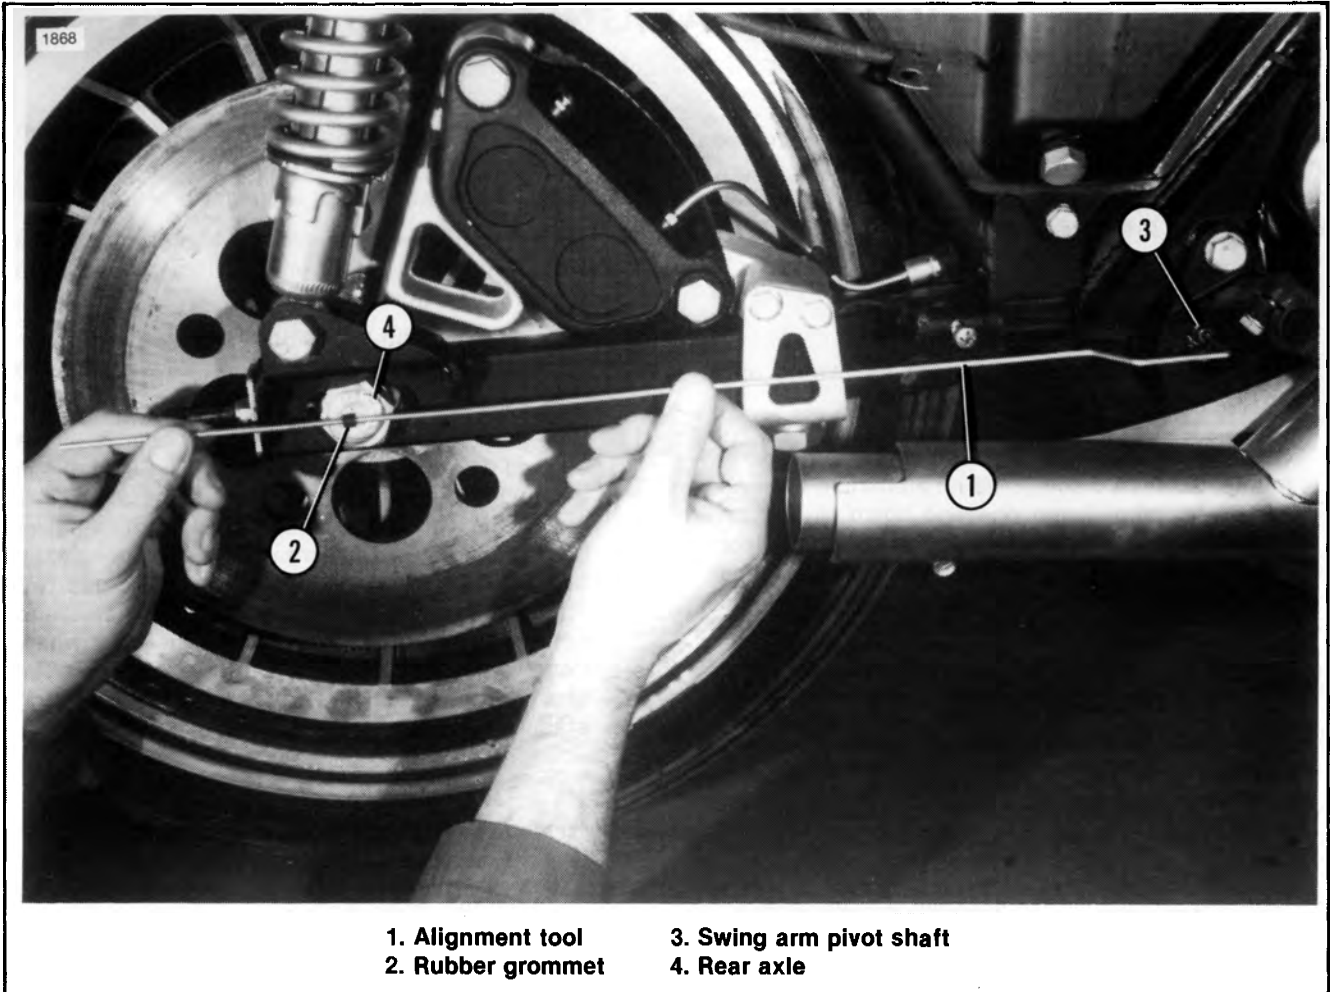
Measuring Rear Axle to Pivot Shaft Distance
